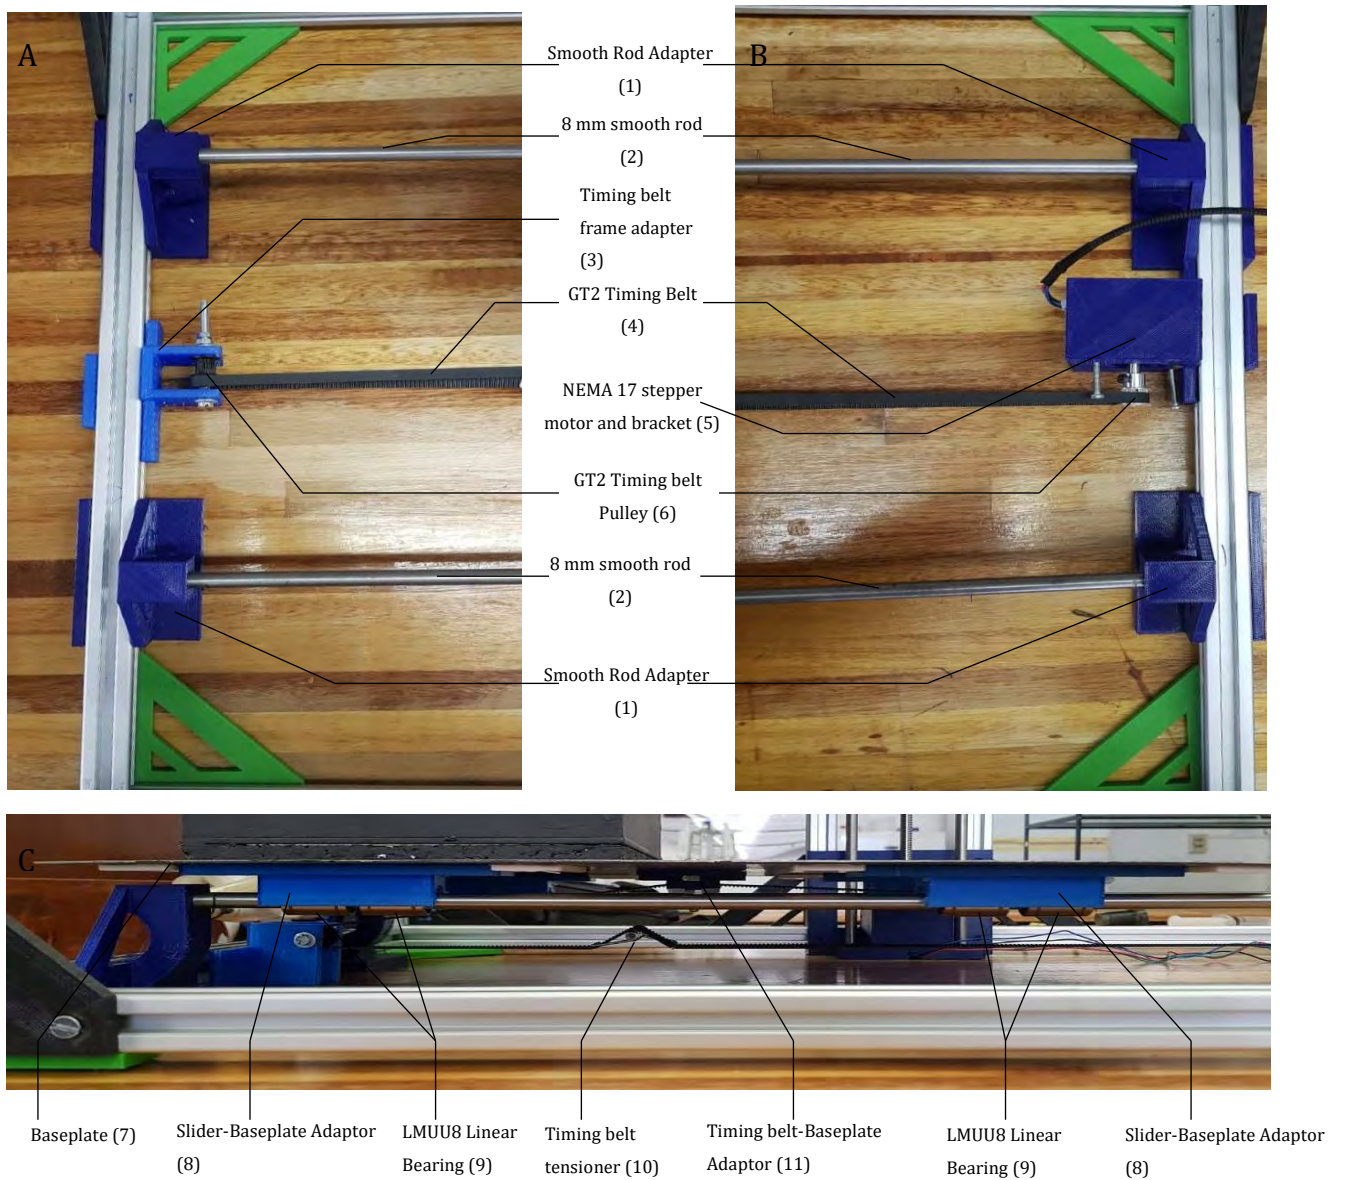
Images of the complete X-Axis assembly of the completed 3D bioprinting unit with individual components numbered (1-11). A: Top view of the left side frame-mounted sub-assembly; B: Top view of the right side frame-mounted sub-assembly; C: Side view of the frame mounted sub assembly.
